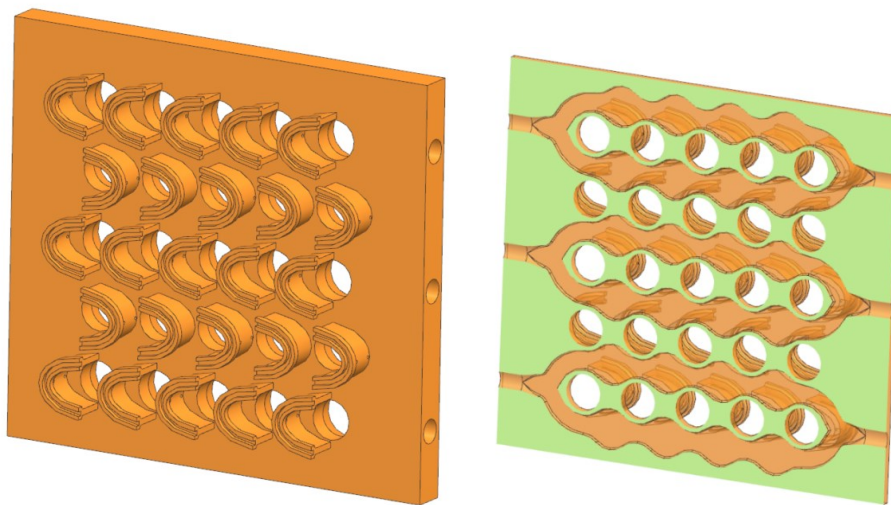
On the left: CAD design of the “Power Test” prototype. On the right: a section showing the DUNED cooling channels.
